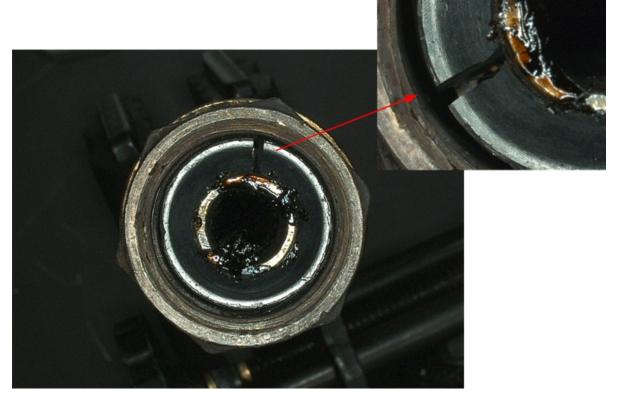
Fractured packing in fuel fitting assembly after 2 hour oven test at 600 degrees Fahrenheit
